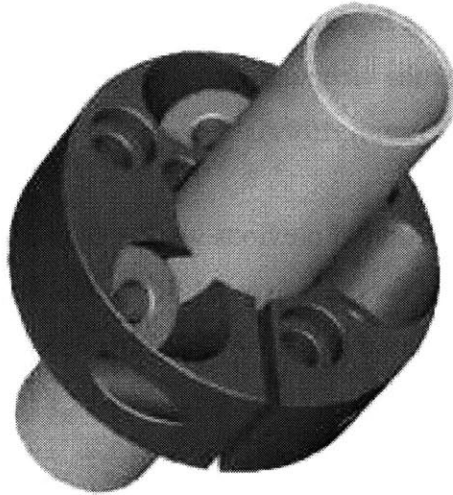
Combined bearing to support linear and rotational motion of the tool shaft developed by the Bleuler Lab (Vollenweider, 1999).
